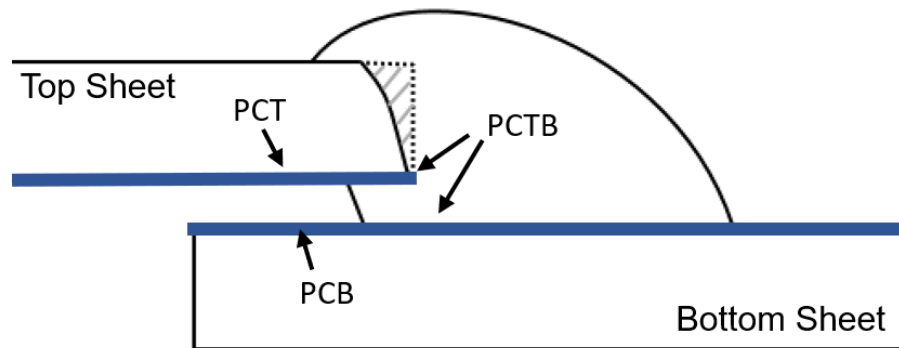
Schematic of a cross-section of braze bead illustrating each plasma cleaned conditions: plasma cleaned top (PCT), plasma cleaned bottom (PCB), and plasma cleaned top and bottom (PCTB).
